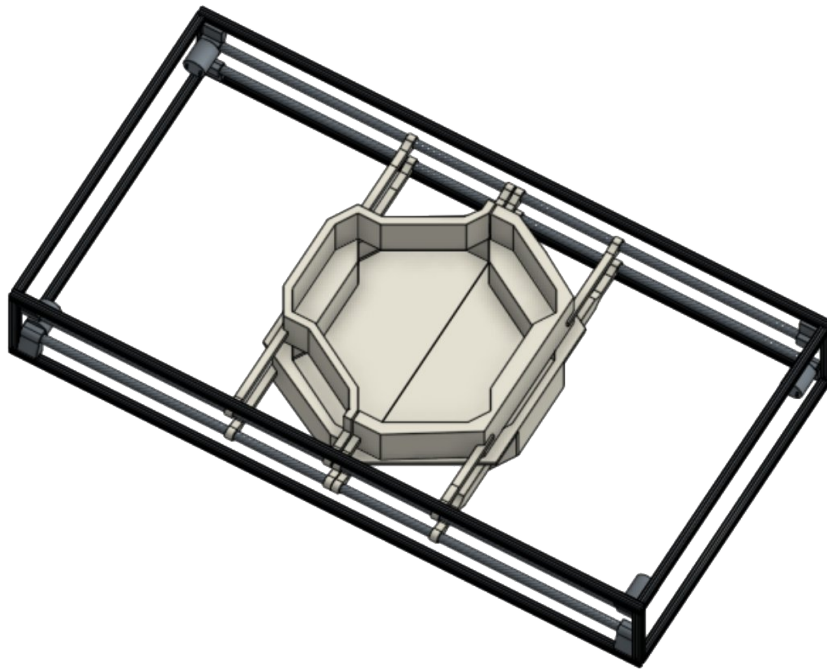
Sinter mold. The sinter mold consists of 4 independently moving parts mounted to the frame via linear actuators. This allows for the top and bottom of the mold to independently move enabling layered construction and vibration of the mold to level regolith.
